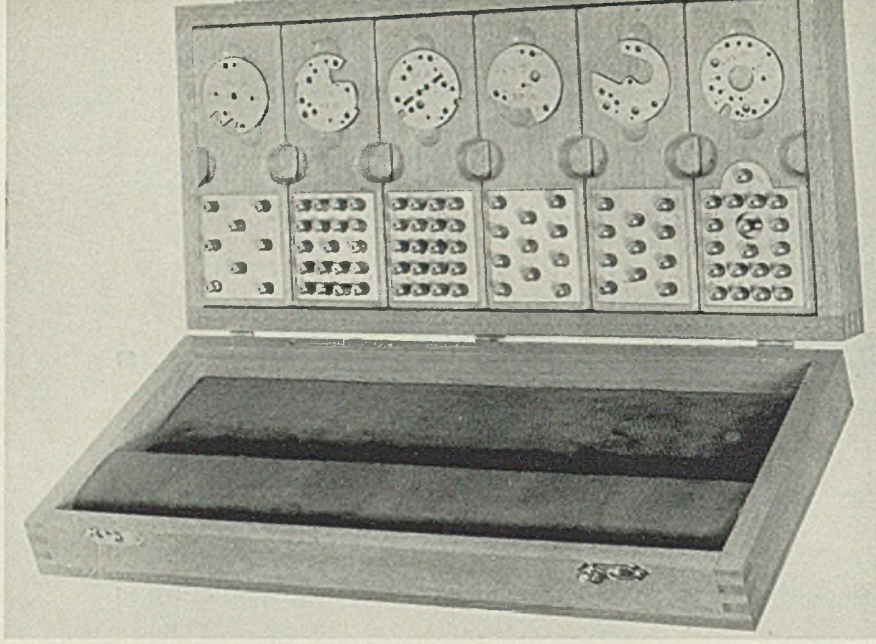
Master gages used to check accuracy of inspection gages used in production work
